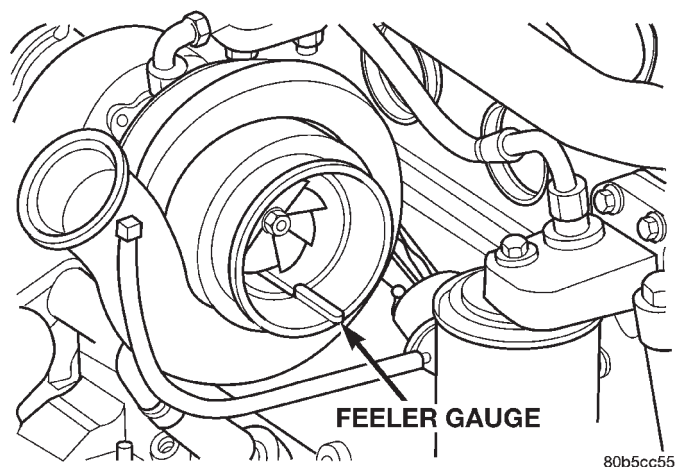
Measure Turbocharger Bearing Radial Clearance
